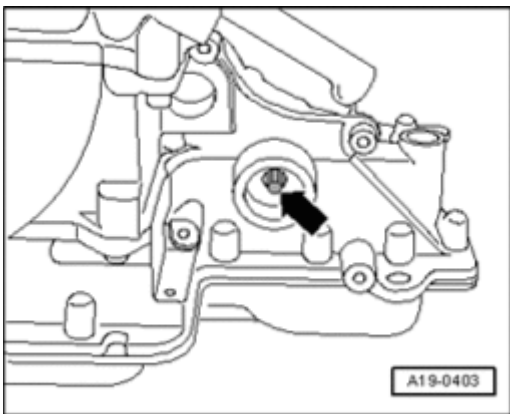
Removing/Installing Drive Shaft For Coolant Pump From Oil Pump
